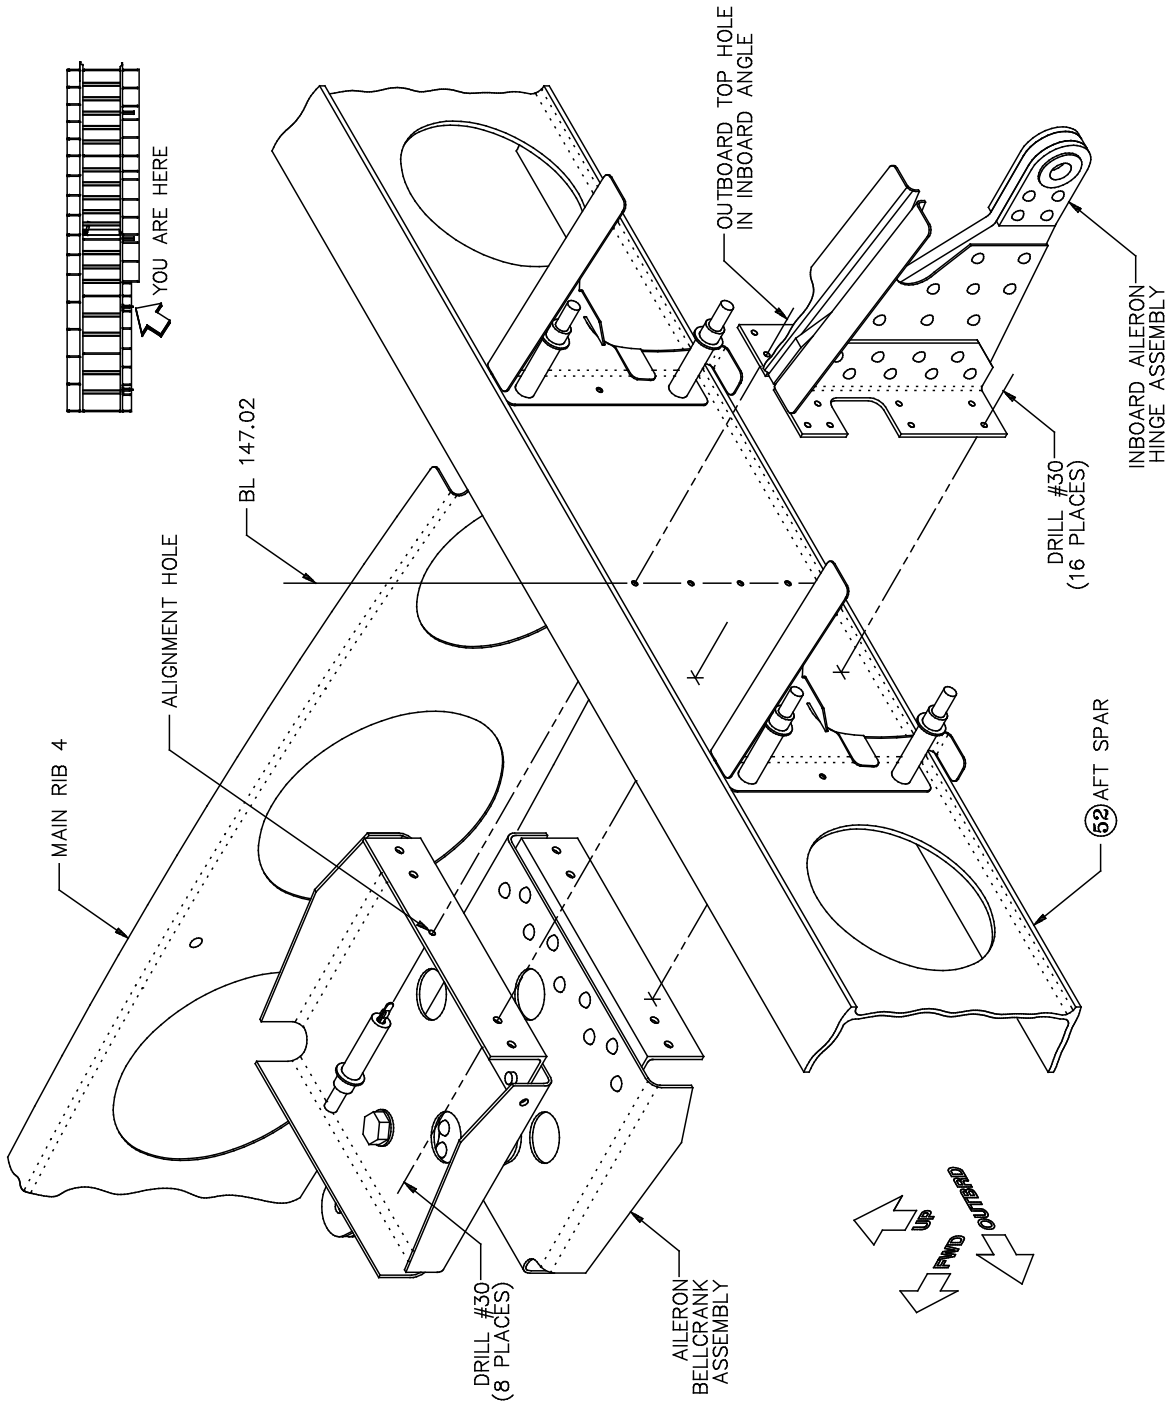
Aileron Bellcrank Assembly and Inboard Hinge Installation
